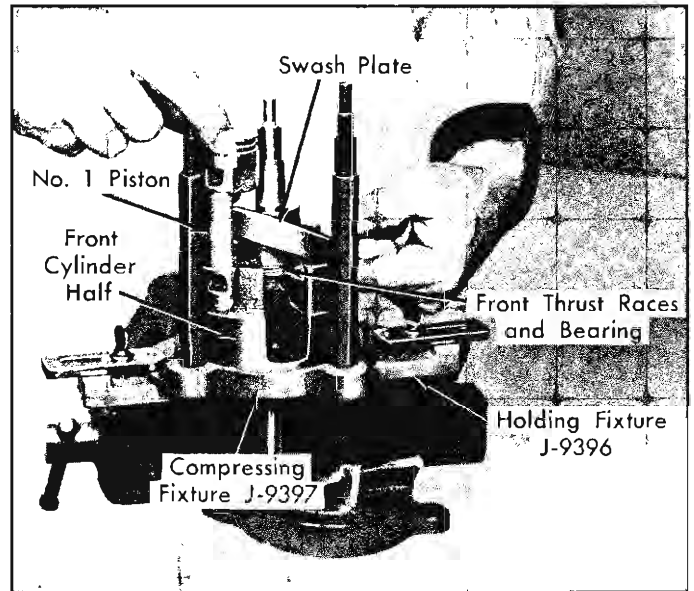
Installing Piston, Front Ball and Shoe and Rear Ball
